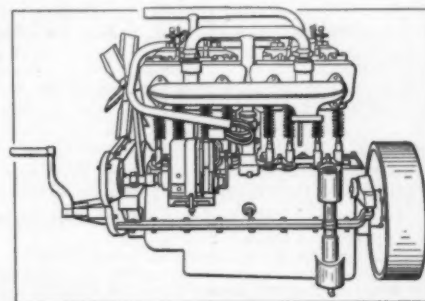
Left side of the motor, showing all the valves on one side and operated by a single camshaft.
